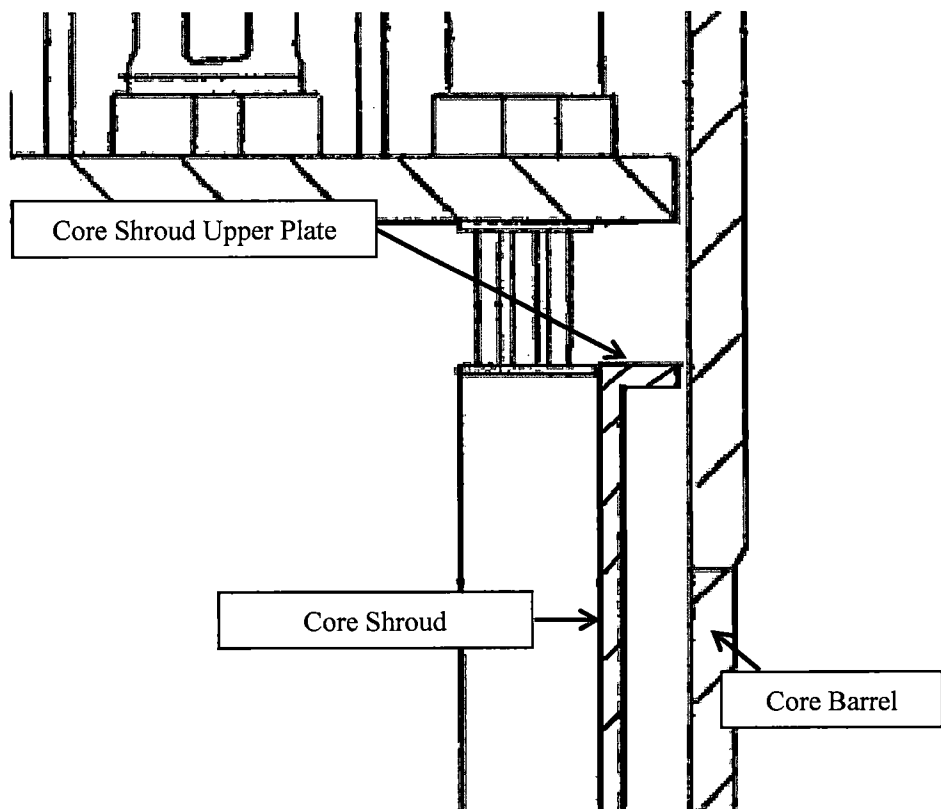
Combustion Engineering System 80 Core Shroud Outlet
